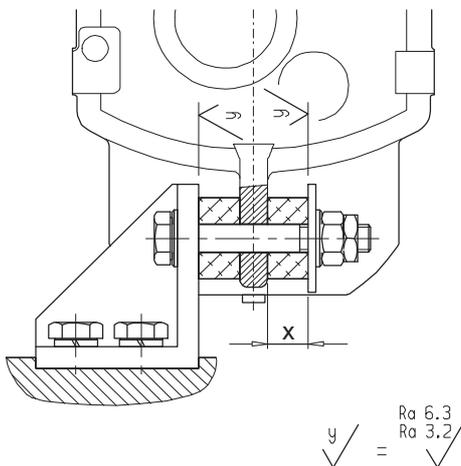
Torque arm on parallel shaft helical gear unit
